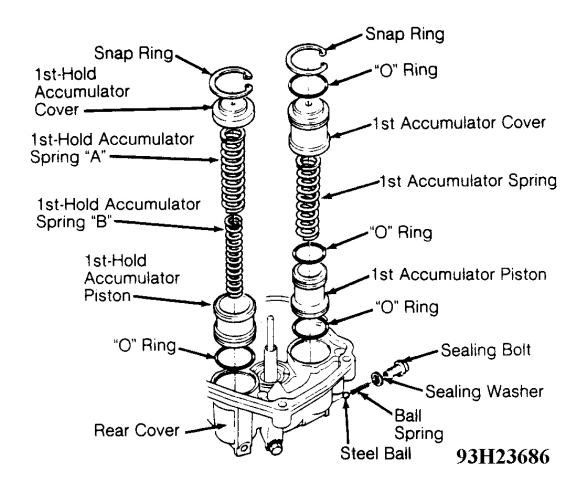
Exploded View Of 1st & 1st-Hold Accumulators Courtesy of AMERICAN HONDA MOTOR CO., INC.
